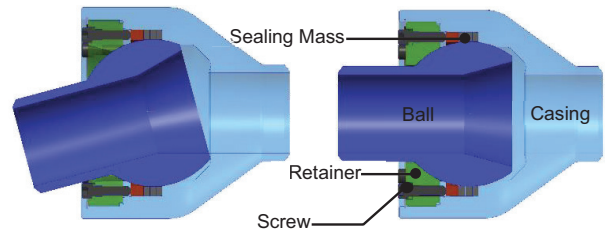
BALL JOINT DESIGN (RIGHT: UNIAXIAL SWIVEL JOINT, LEFT: MULTIAXIAL FLEXIBLE JOINT)
